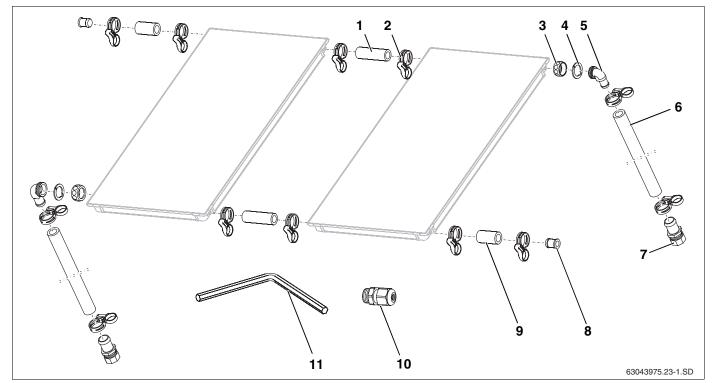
Connection kit and connection set (illustration shows 2 portrait collectors)
